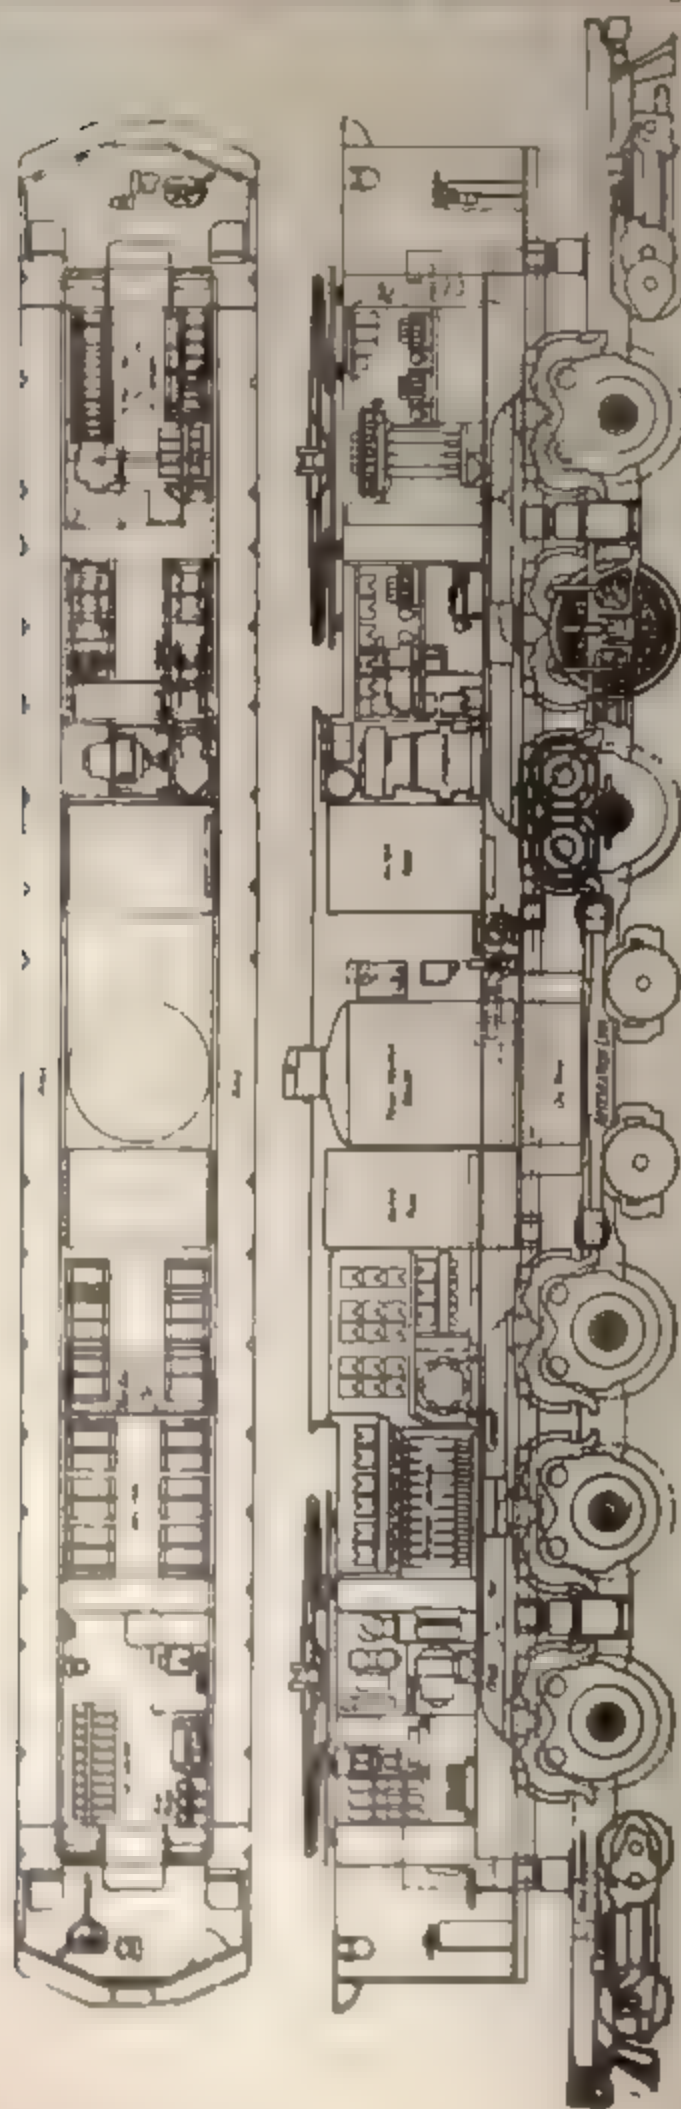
Plan and sectional view of Westinghouse-Baldwin direct-current locomotive for C, M. & St. P. Railroad. Twelve motors are employed to drive six axles, trolley pressure 3,000 volts; length between couplers 88 feet 7 inches.
